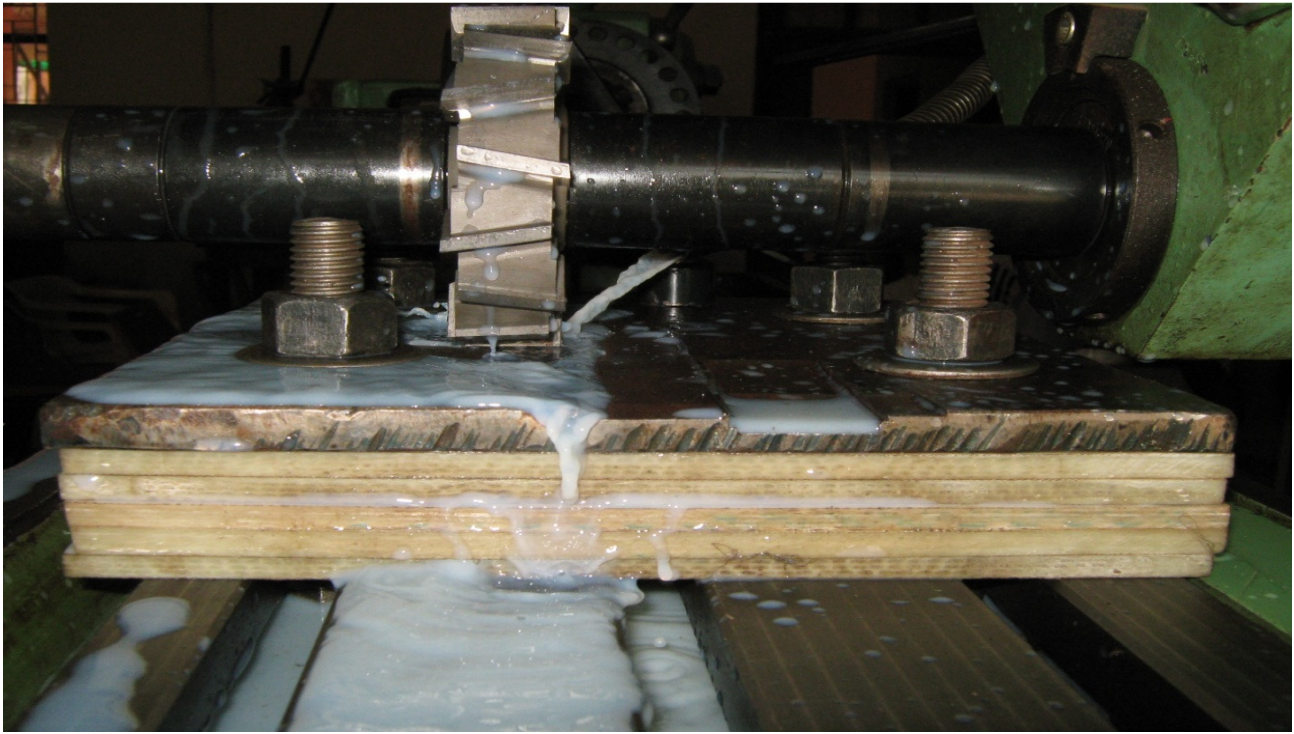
Five layers of Glass fiber polyester bolted to the slotted table milling machine
